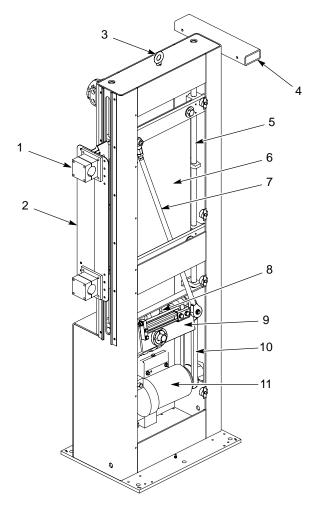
Typical Oscillator Components (Shown with access doors removed)
